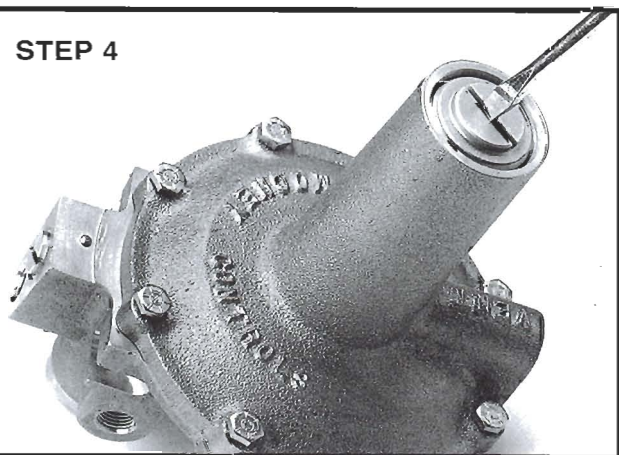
The spring tension is released by unscrewing the Spring Adjuster.
